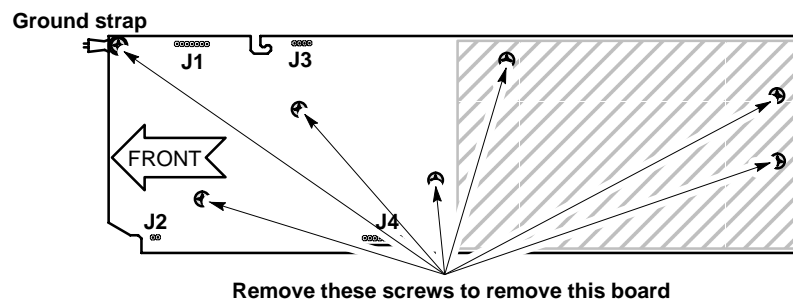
Screws holding the Power Supply circuit board (A1) in place
